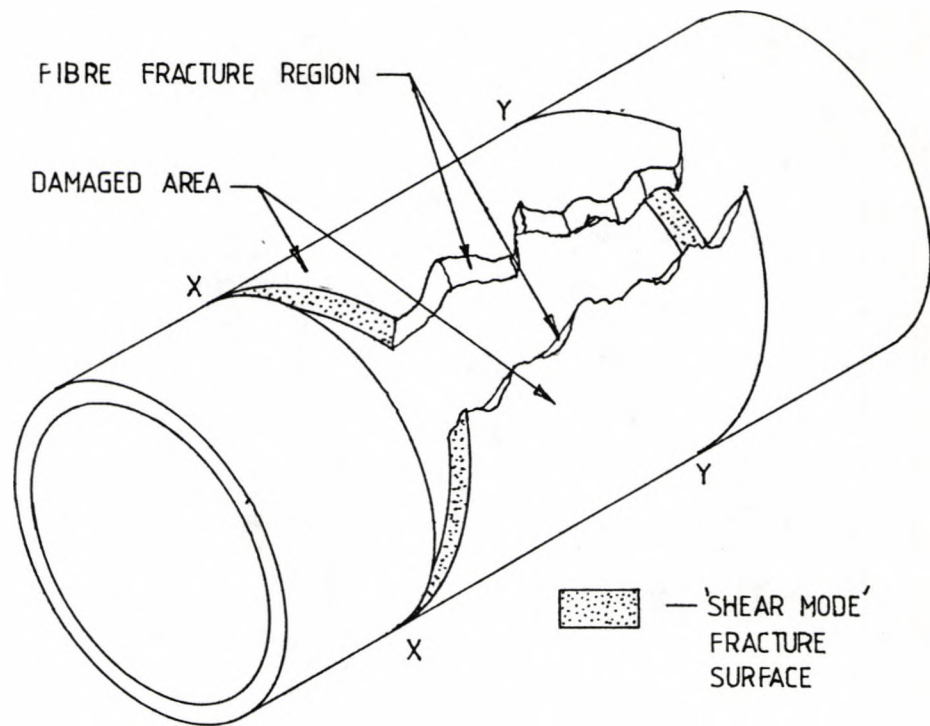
Oblique View of the Fracture Zone in Hoop Wound Specimen Due to Pure Internal Pressure Loading.
